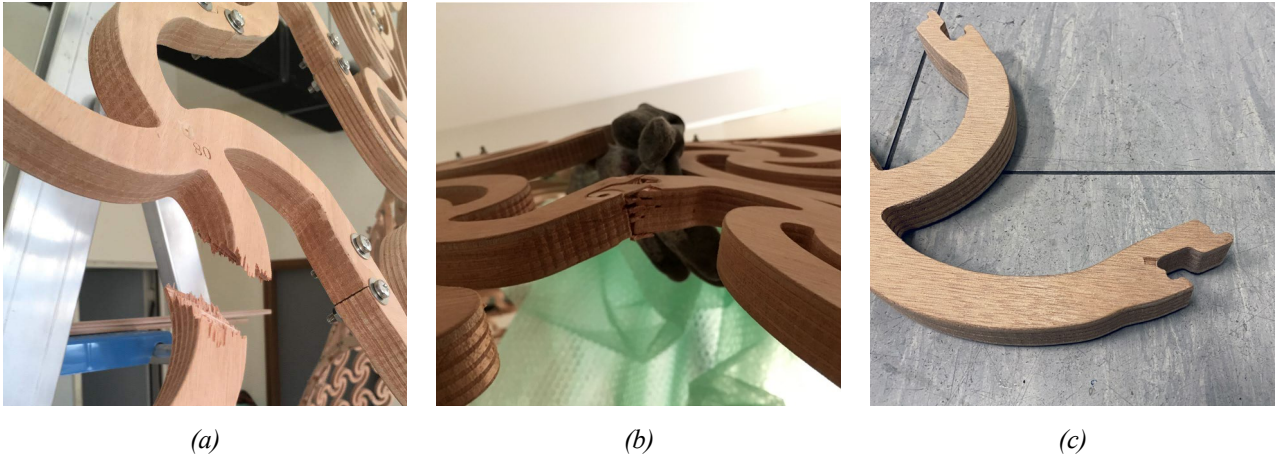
Failure cases occurring during assembly/disassembly: (a) traction/bending; (b) delamination; (c) minor failures.
